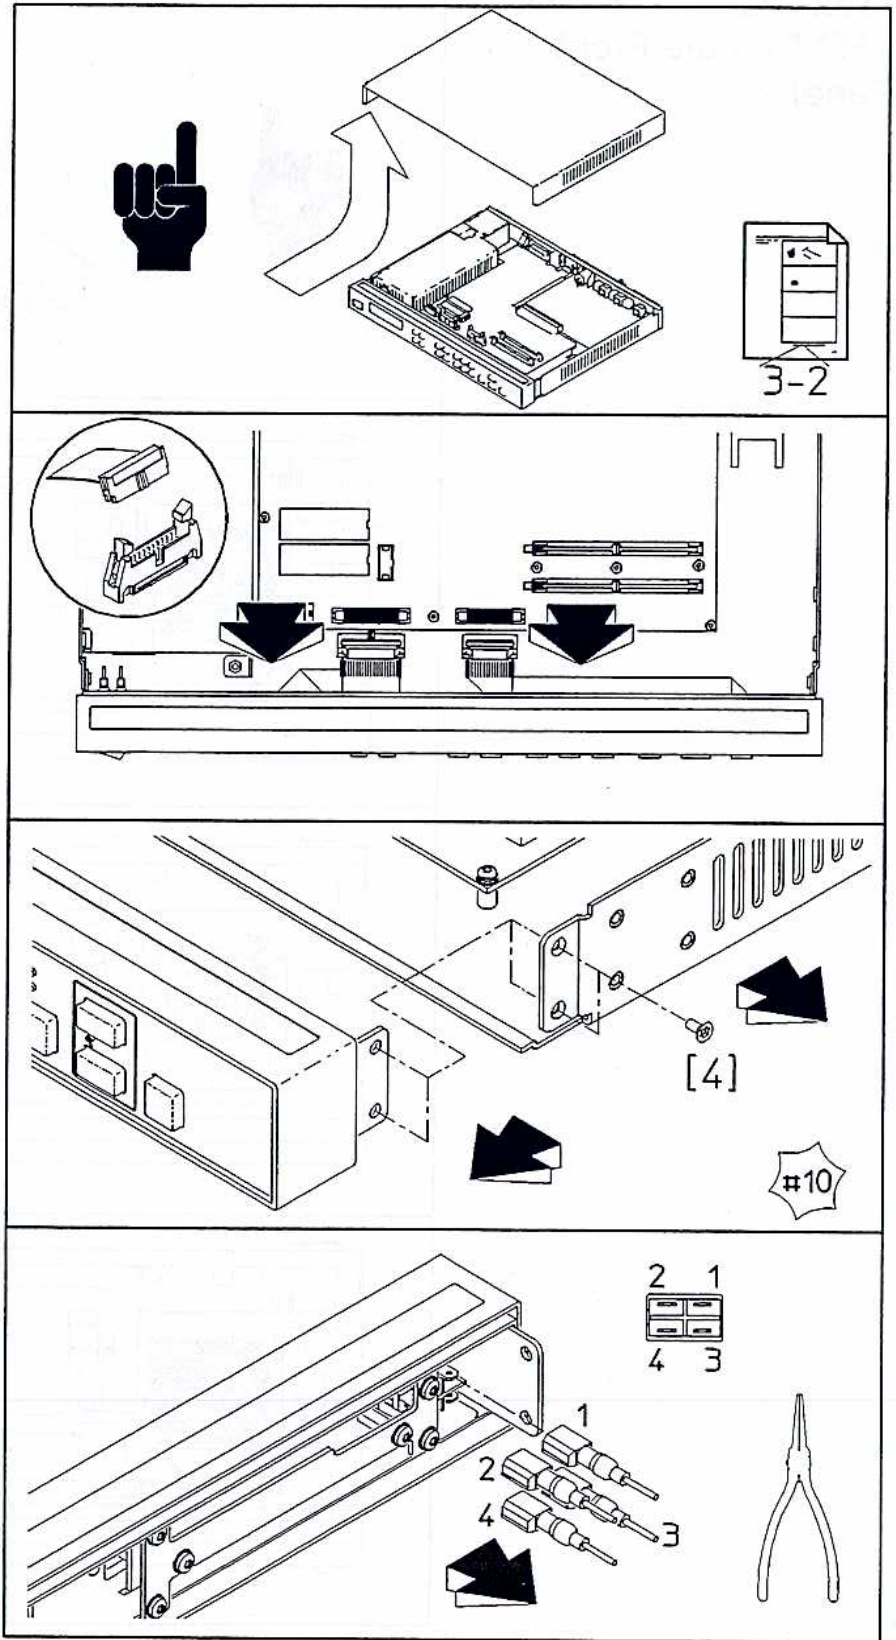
Front Panel Removal (HP VidJet Pro)
